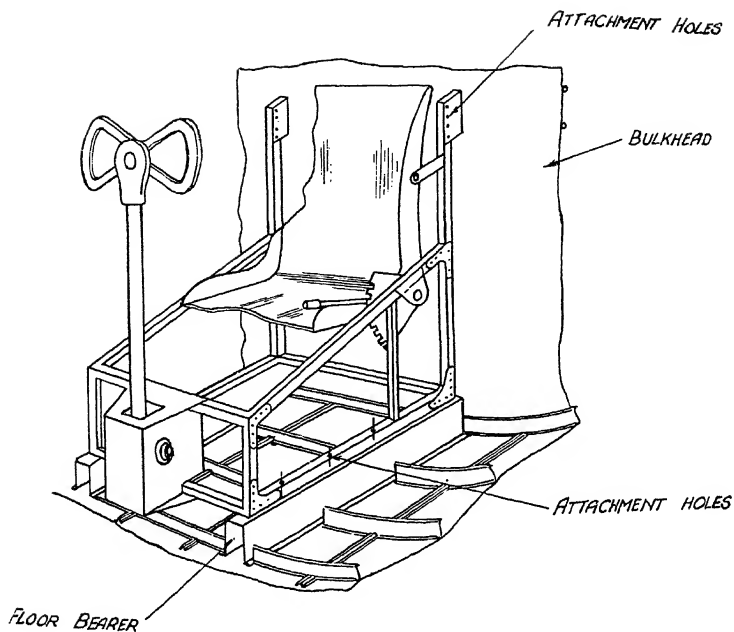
SEAT STRUCTURE ASSEMBLY.
